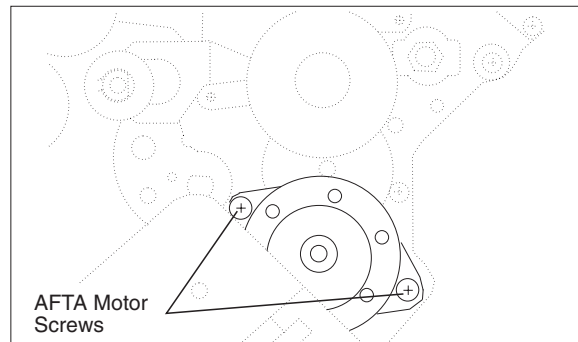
AFTA Motor Screws. (Viewed From Left Side)
